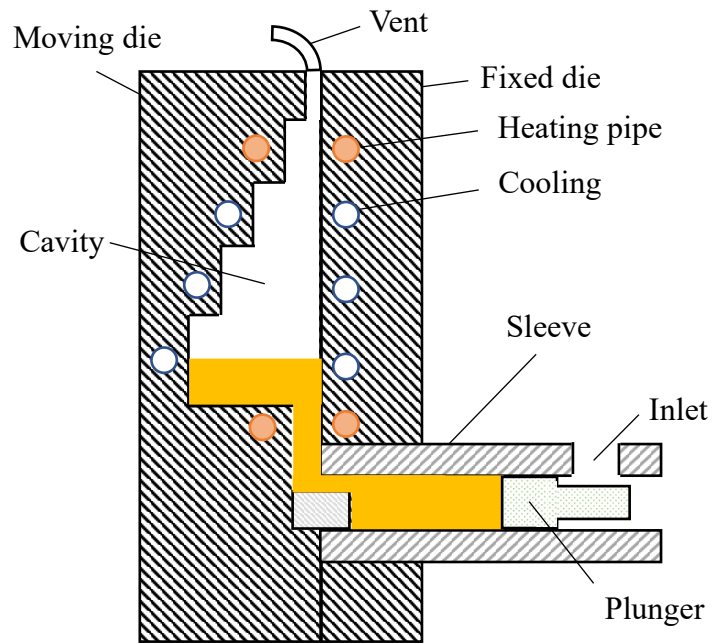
Schematic diagram of the die casting machine⁽⁵⁰⁾
